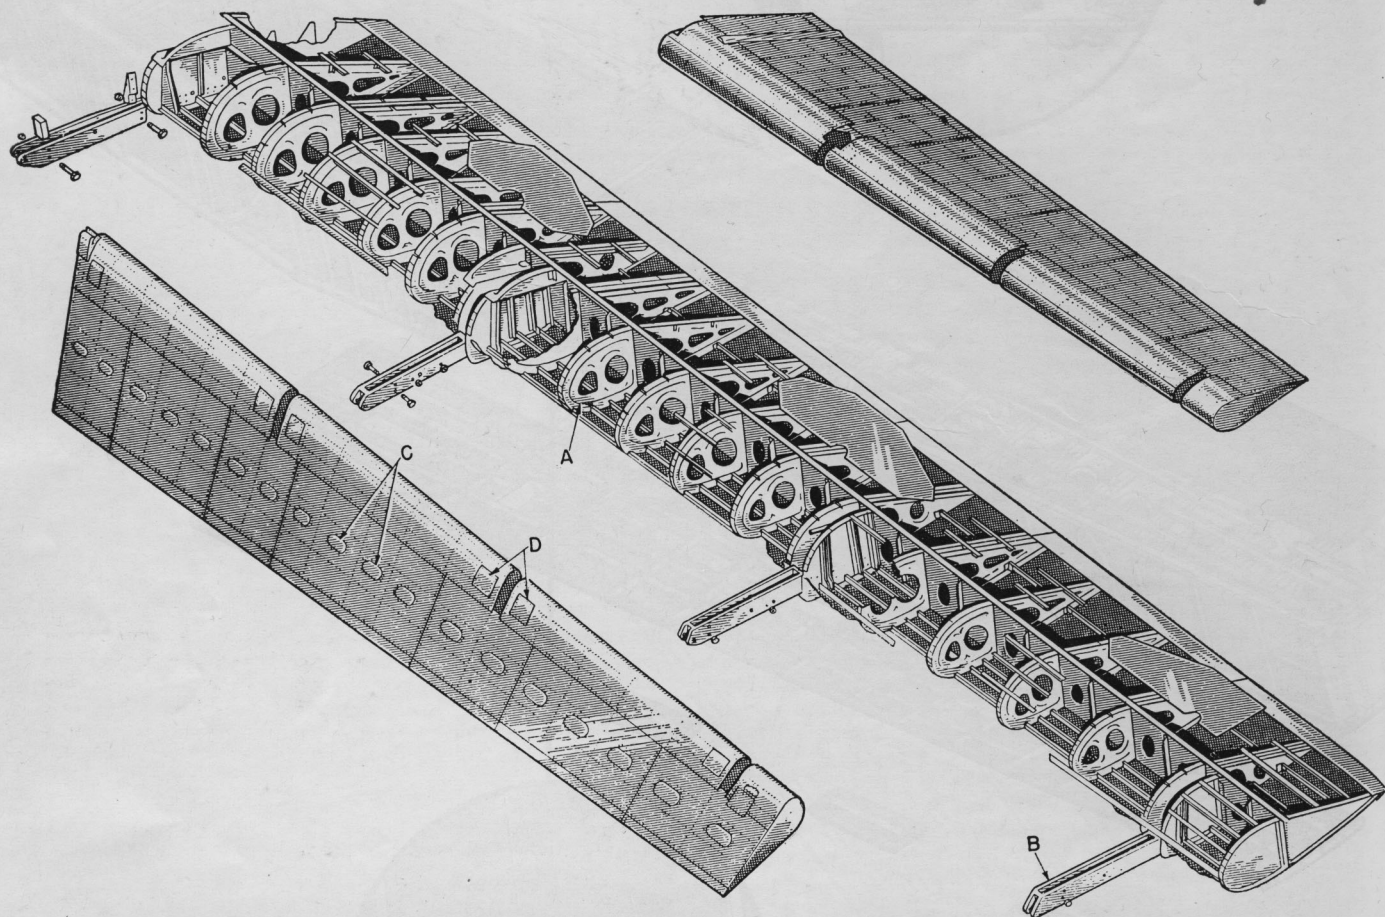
This cutaway sketch (center) of a Douglas C-54 Skymaster left wing flap shows a typical deep-drawn rib (A) and aluminum alloy hinge link base forging (B). The sketch at the left shows the lower skin of the flap, with typical inspection plates at (C), and hinge link mechanism access plates at (D). The sketch at the right shows an upper surface of the flap.
